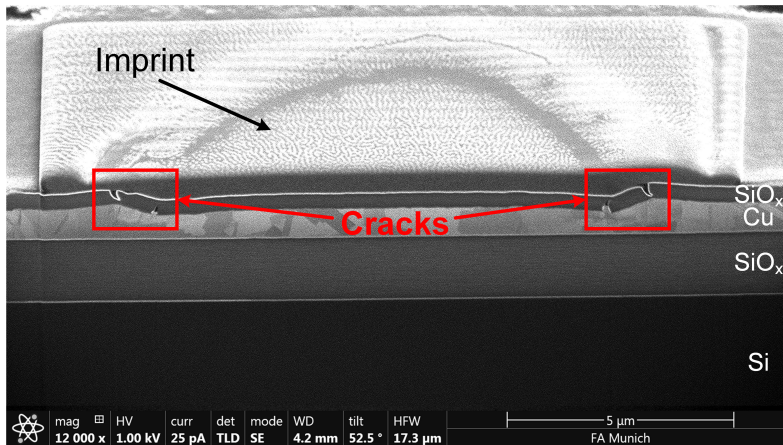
Mechanical failure in upper oxide layer below pad.
